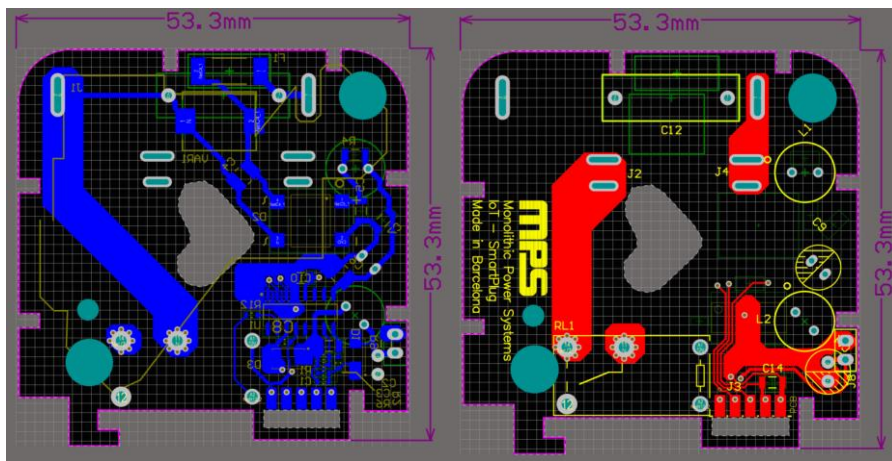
PCB Power bottom layer (blue) and top layer (red).
